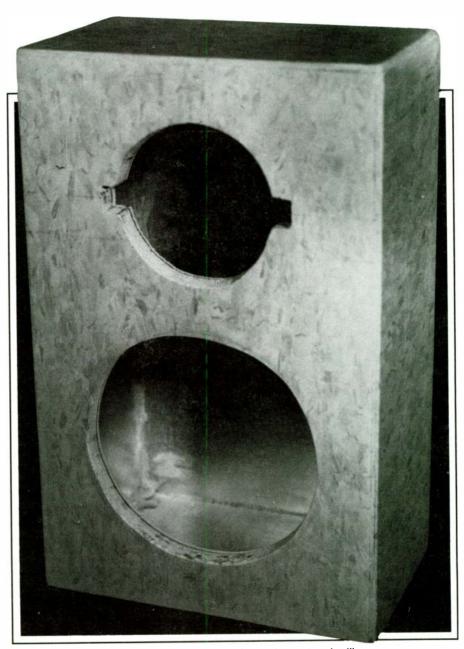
Completed enclosure ready for hardware, fur coat and grilles.
